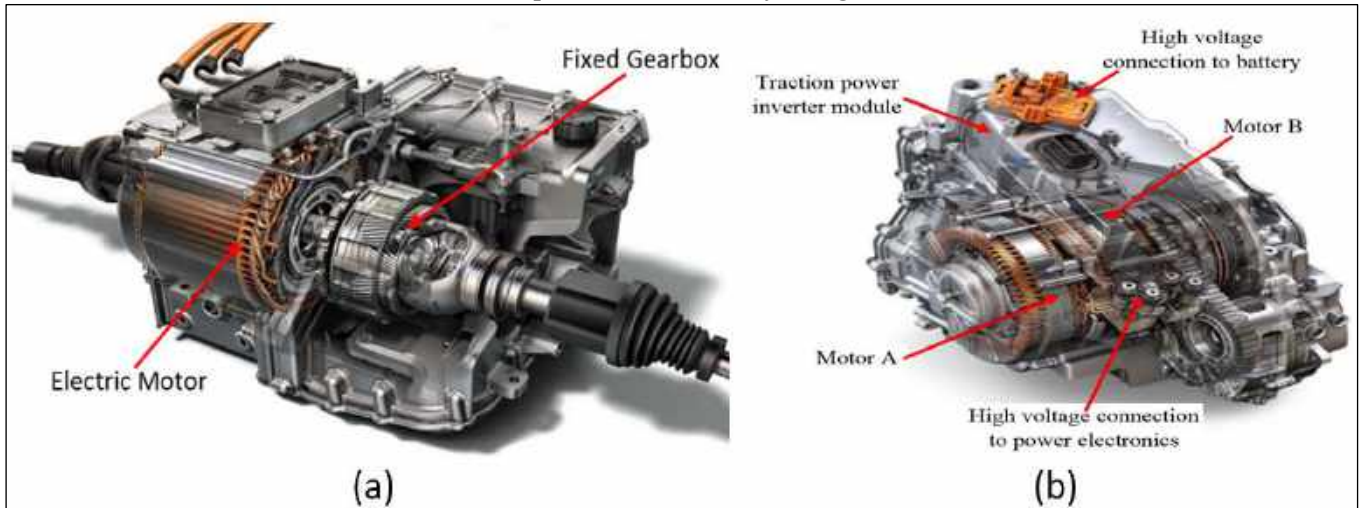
(a) One Electric Motor, (b) Two Electric Motor Tracking System
